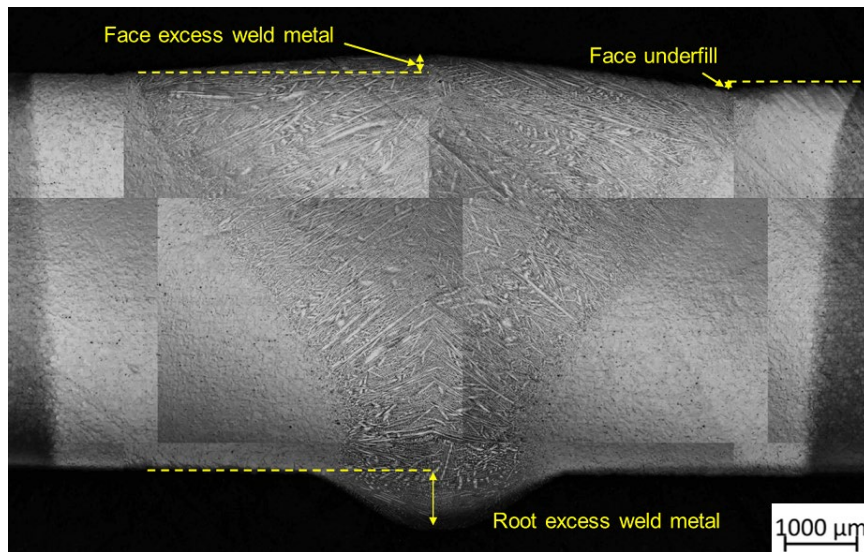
Macro image displaying the example of bead geometry and the measurements.
